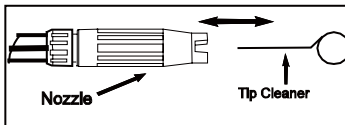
Insert tip cleaner in nozzle hole and move back and forth until debris is dislodged
